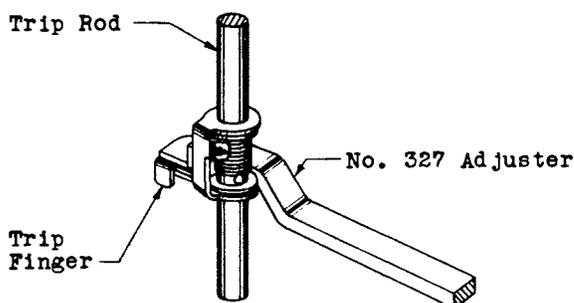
Method of Adjusting Clearance Between Bottom of Trip Finger Flange and Trip Lever
